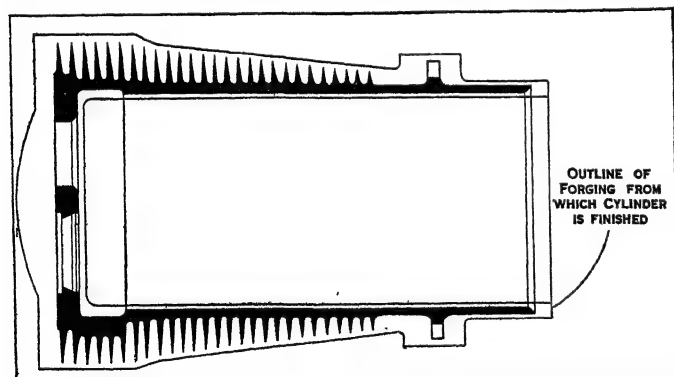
SECTIONAL DRAWING OF BRISTOL "JUPITER" RADIAL AERO-ENGINE CYLINDER
